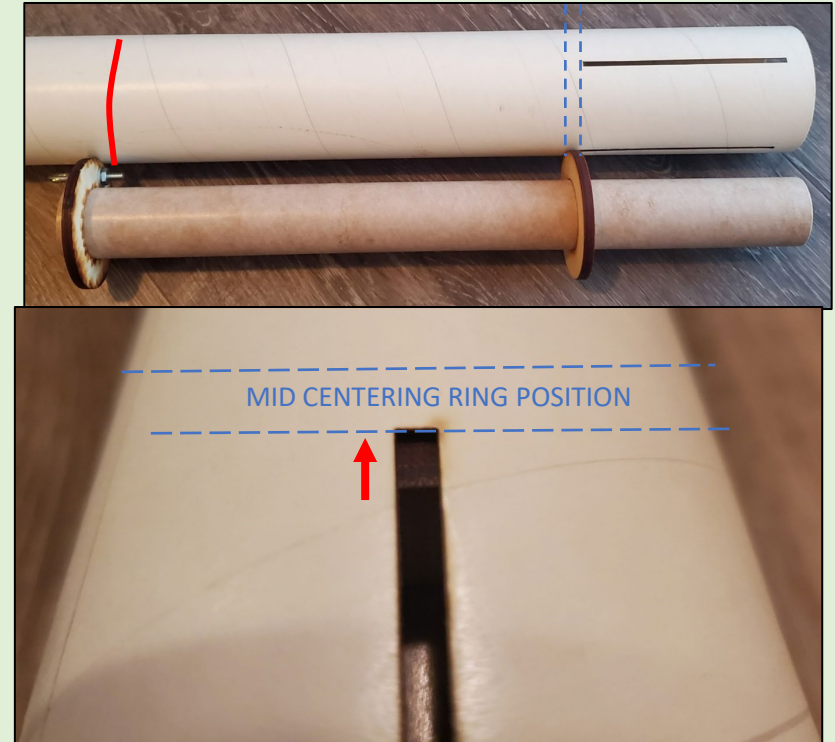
Relative Position of MMT Assembly Once Installed in Airframe (Top); Mid Centering Ring Should Sit Forward of Fin Slots (Bottom)
